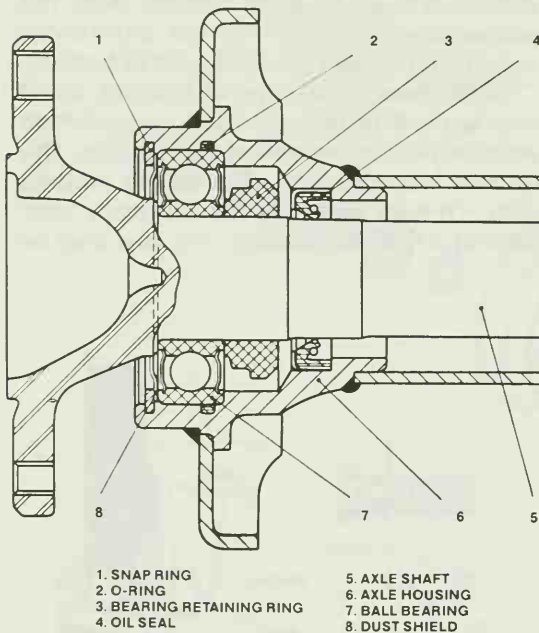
This oil seal is installed on the inside of the axle bearing.
